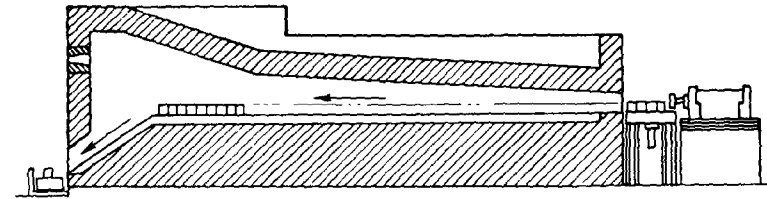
Example of a Pusher-type, Continuous Billet Heating Furnace.
